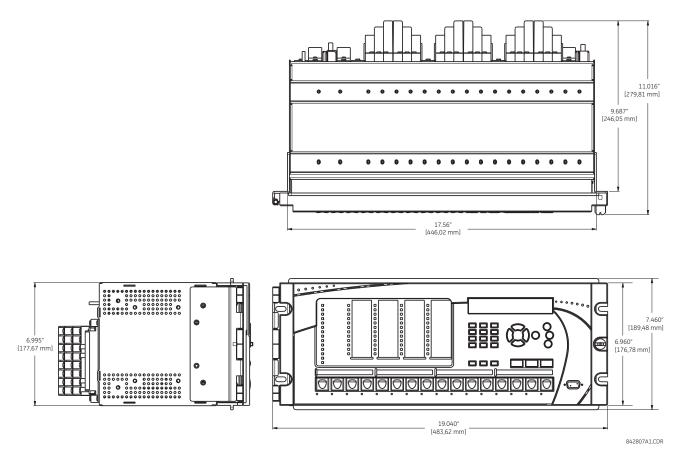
T35 HORIZONTAL DIMENSIONS (ENHANCED PANEL)
